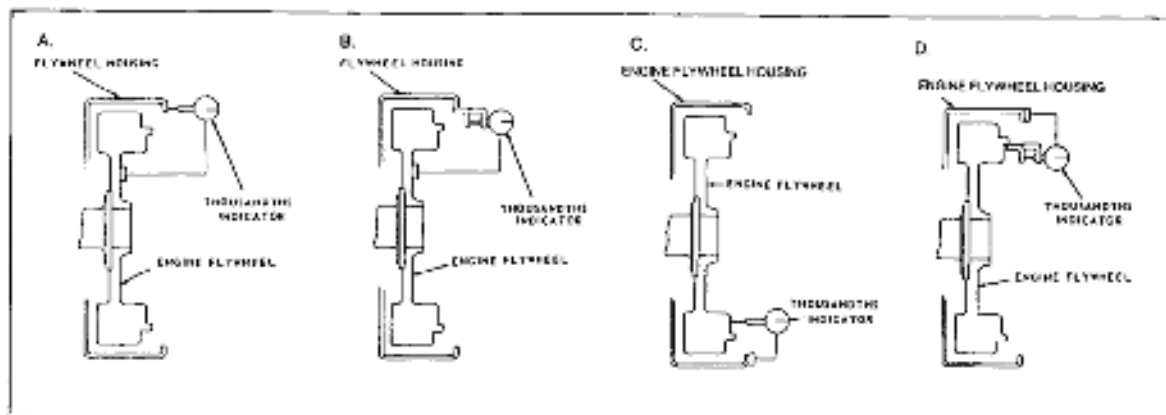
Dial Indicating Engine Flywheel and Flywheel Housing
